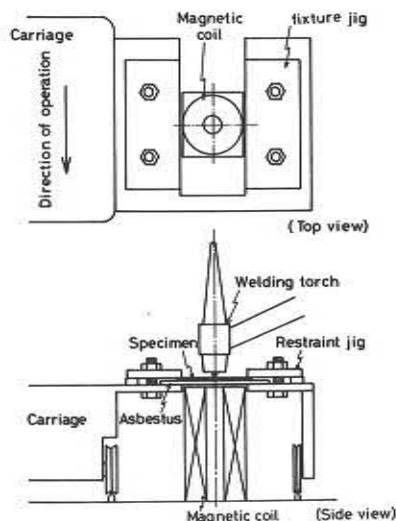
Arrangement of magnetic coil, welding torch and specimen
